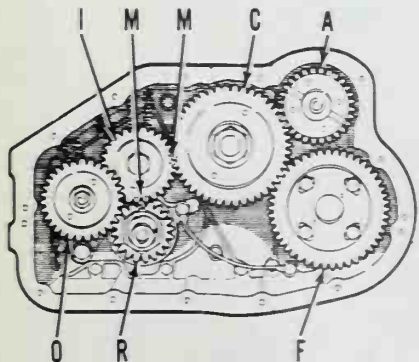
View of timing gears on Models 834 and L54. Refer to Fig. L3-15 for identification except for F. Fuel injection pump drive gear.
